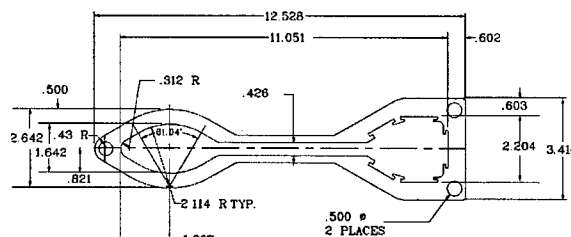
Storage ring vacuum chamber cross section (dimensions shown are inches)
